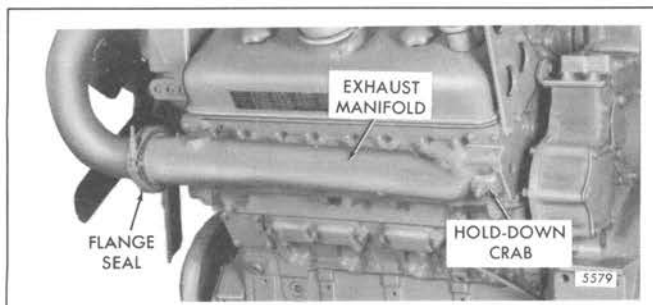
Typical Cast Air-Cooled Exhaust Manifold Mounting
